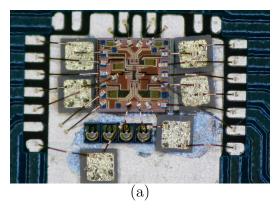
An example optoelectronic assembly on an FR-4 PCB.
